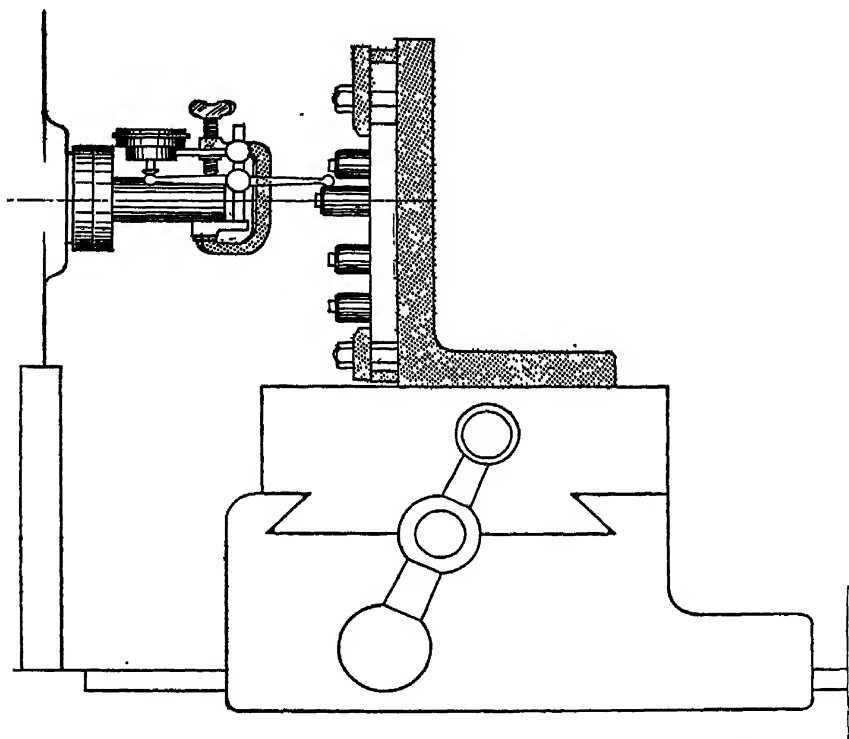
BUTTONS AND TEST INDICATOR AS USED IN A MILLING MACHINE FOR LOCATING THE HOLES IN A JIG
